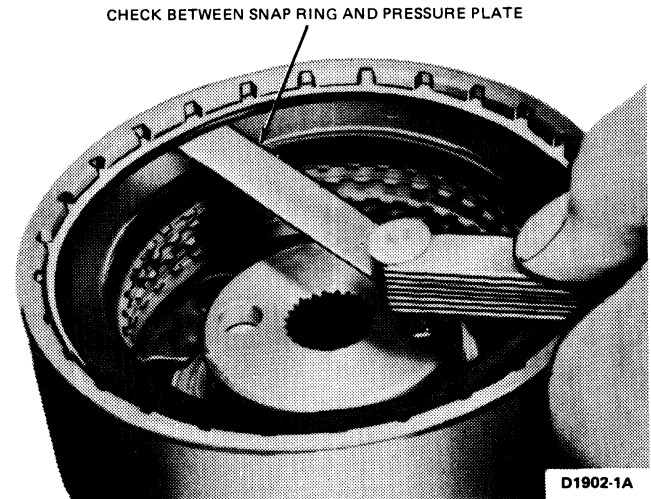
Checking Forward Clutch Snap Ring Clearance
